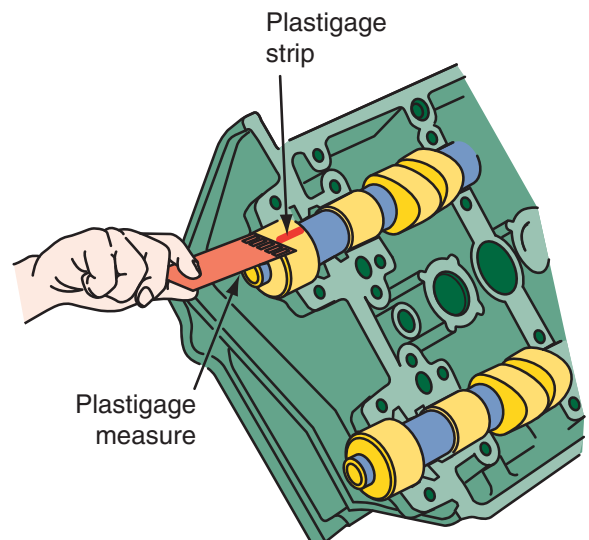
OHC camshaft bearing clearances can be checked with Plastigage.
